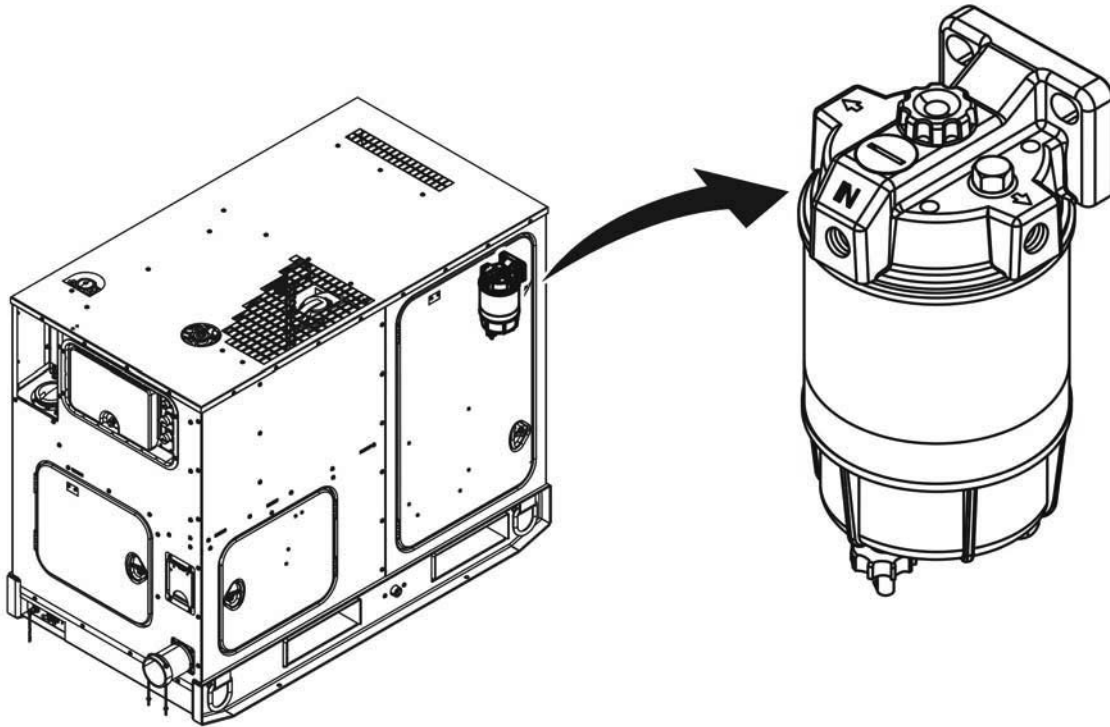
Fuel Filter/Water Separator Assembly — Location.
